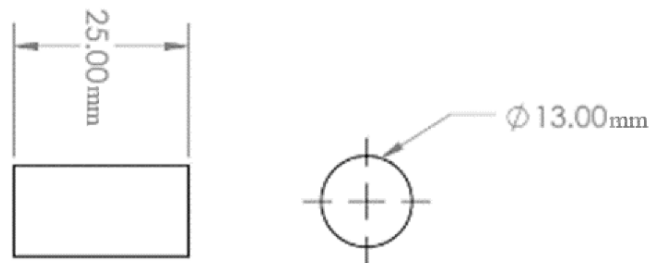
ASTM E9-19 short solid cylindrical specimens [82]
